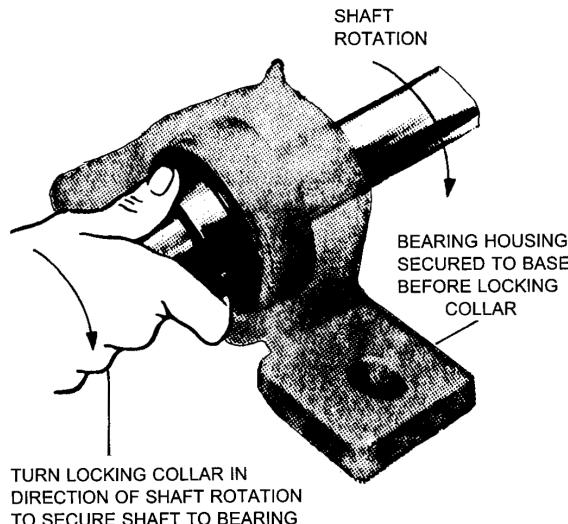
BEARING WITH ECCENTRIC CAM
